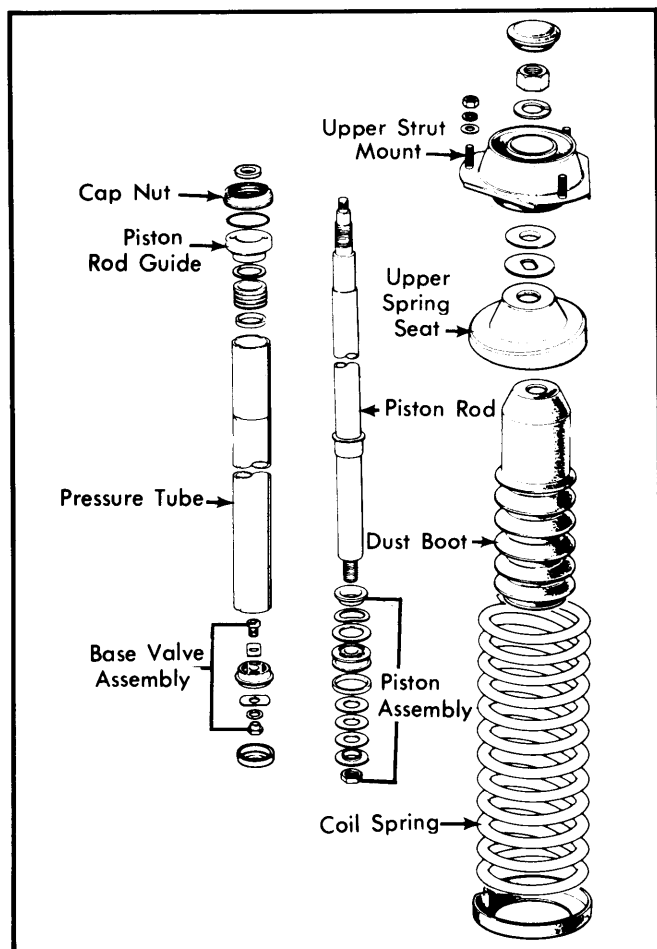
Exploded View of Strut Assembly (RWD Models Only)
